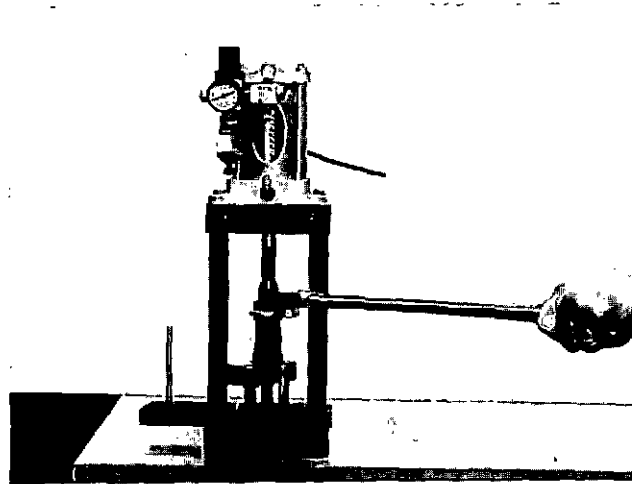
, (F60309). Loosen the flanged injector cup retainer
